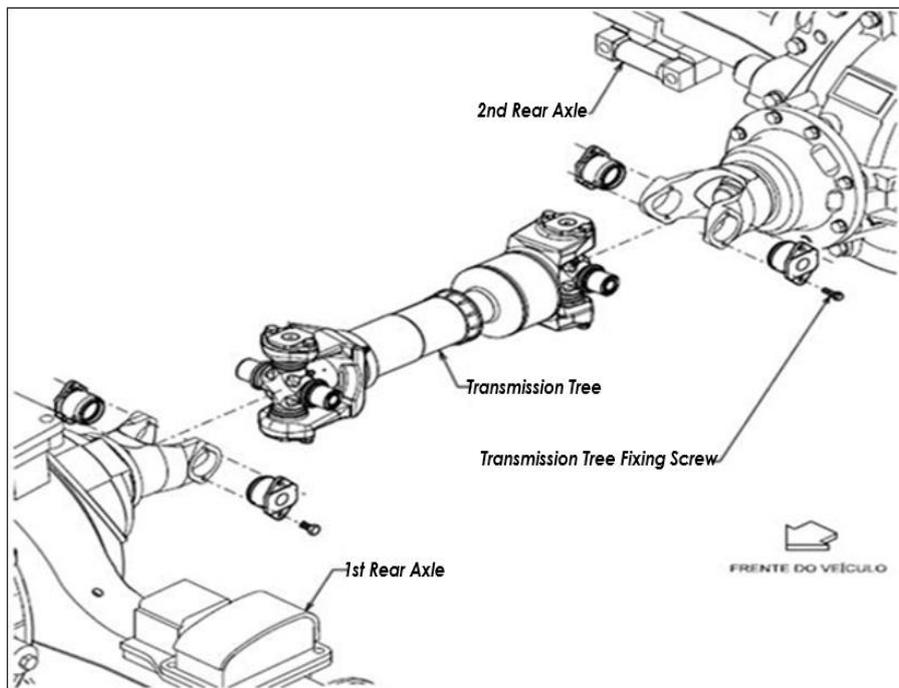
Assembly of cardan between the rear axles of a 6x4 vehicle.
